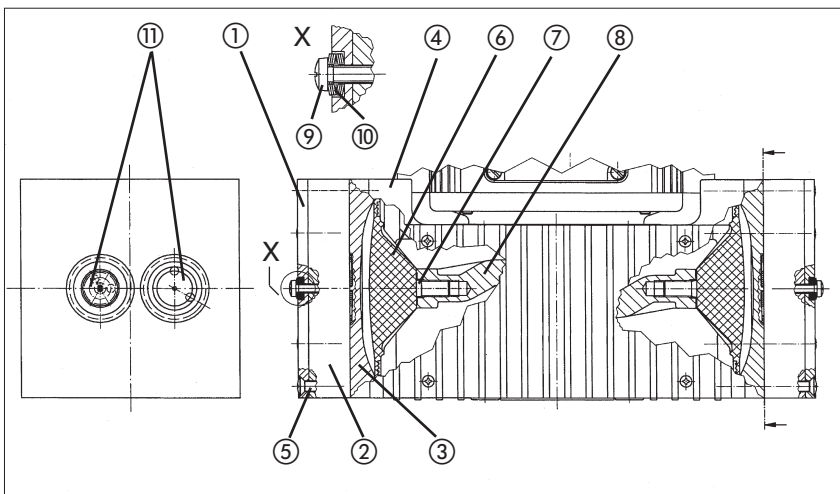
Cross section of pump heads for pump N 860.3 FT.40.18 (symbolic)
